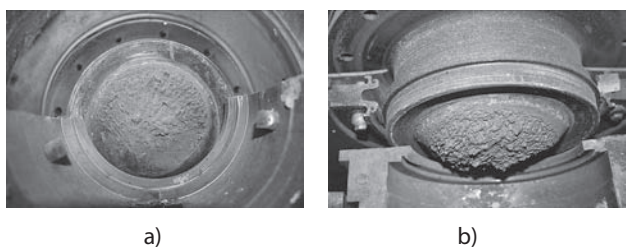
Details of the fracture surface of the shaft from the side of turbine
